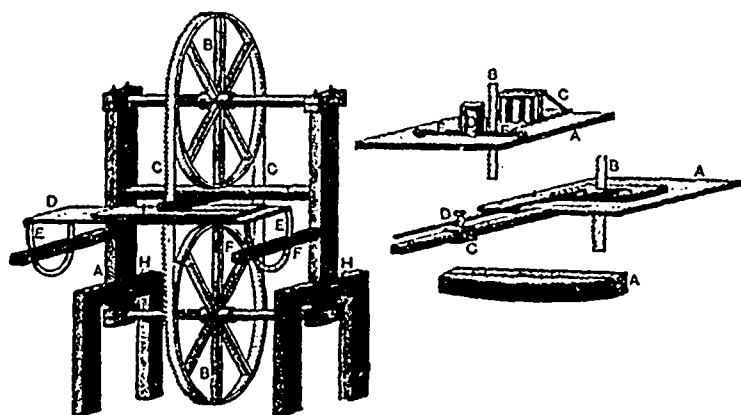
THE FIRST BAND-SAW MACHINE.
